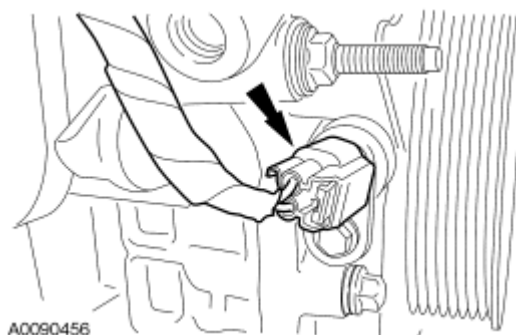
Locating Crankshaft Position (CKP) Sensor Electrical Connector
